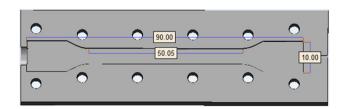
Tensile strength standard parts mould and relevant dimensions
